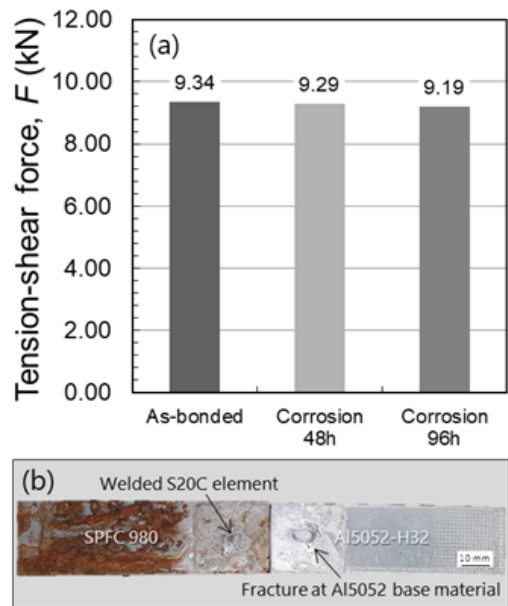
(a) Tensile-shear strength after salt spray corrosion tests and (b) its fractured joint specimen
